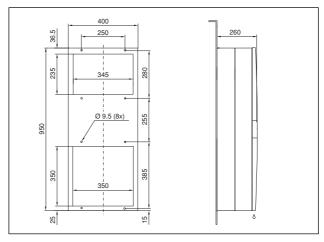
SK 3304.xxx/SK 3305.xxx external mounting
